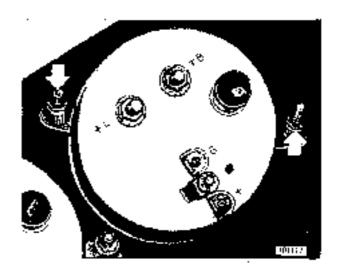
I-1 2 Rear View of Ammeter and Oil Pressure Gauge
